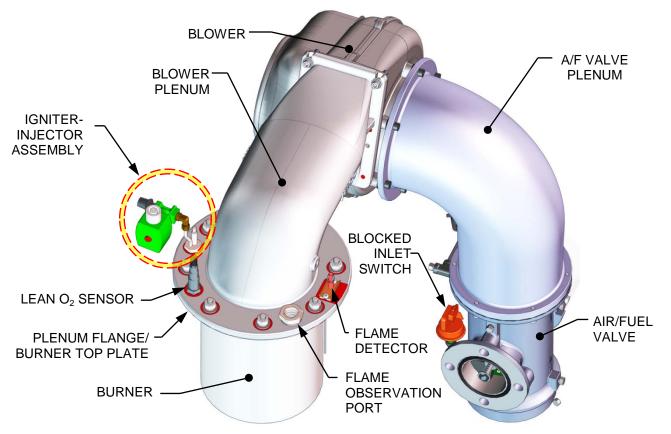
BMK 1500/2000 Burner Assembly (Removed from Boiler)
